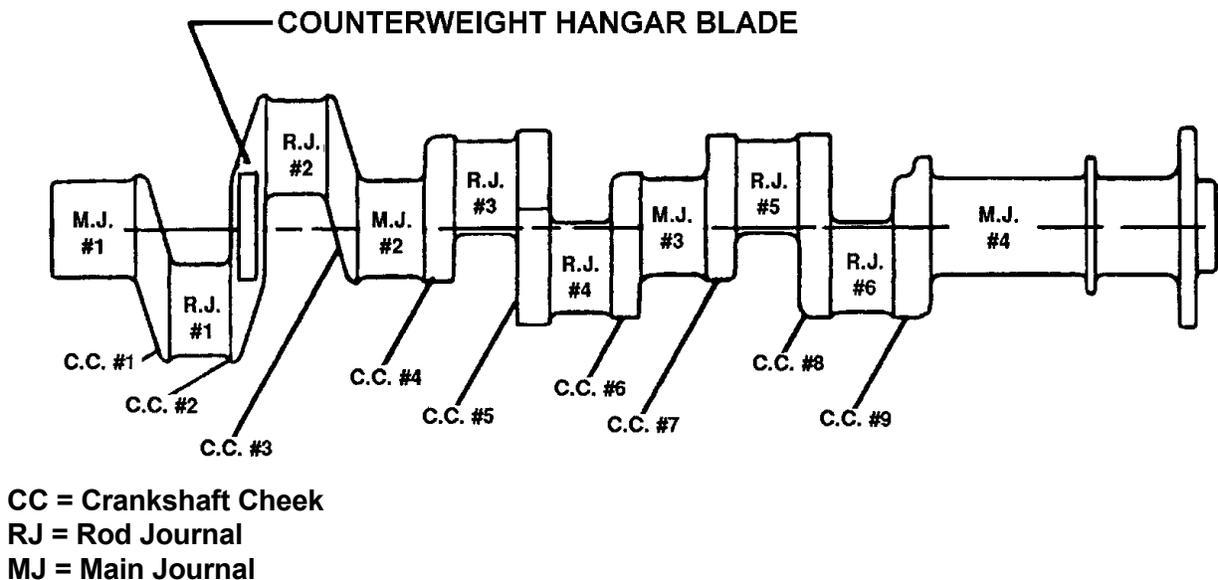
CRANKSHAFT DESCRIPTION
